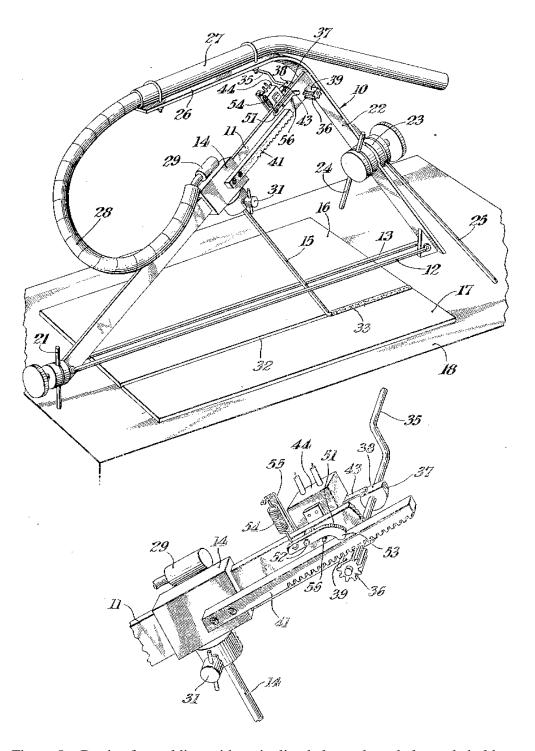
Device for welding with an inclined electrode and electrode holder
